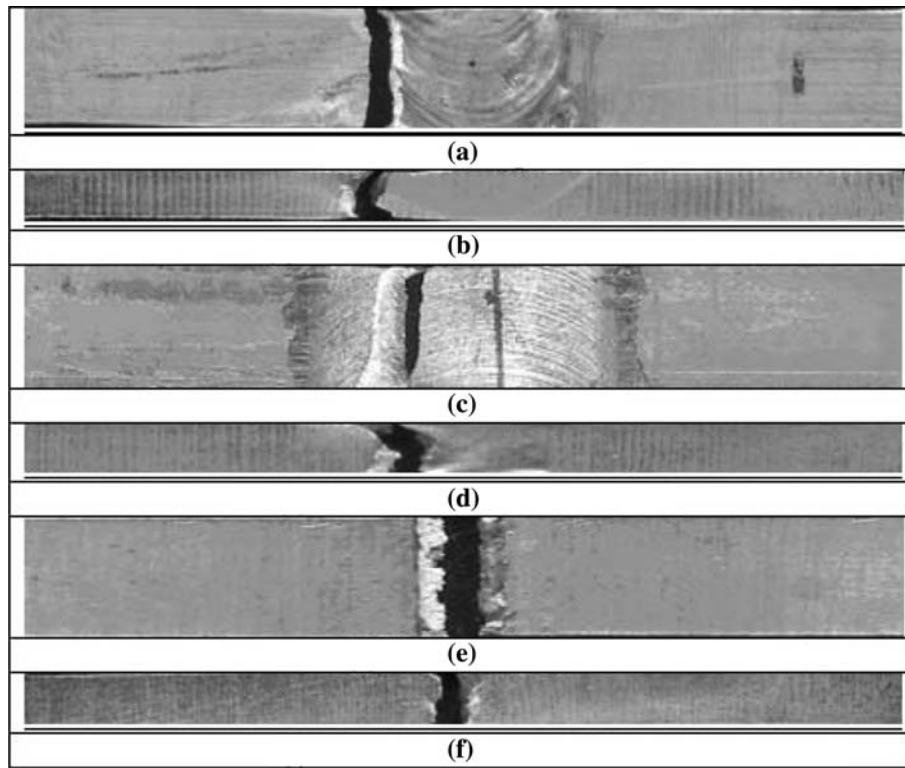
Failure path in tensile specimens: (a), (c), and (e) represents top view of GTAW, FSW, and LBW, respectively. (b), (d), and (f) represents cross-sectional view of GTAW, FSW, and LBW, respectively
